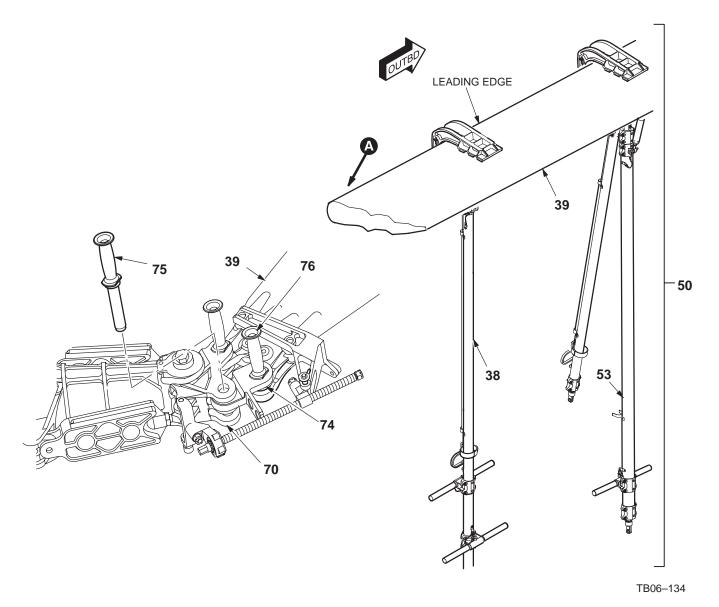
Remove Quick Release Fold Pins from L/H AFT Blade Block
